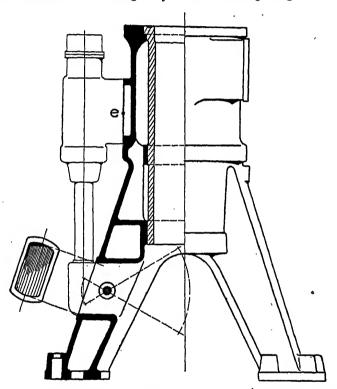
Framing for Stationary Engine with Compressor worked by Levers from Connecting rod.
